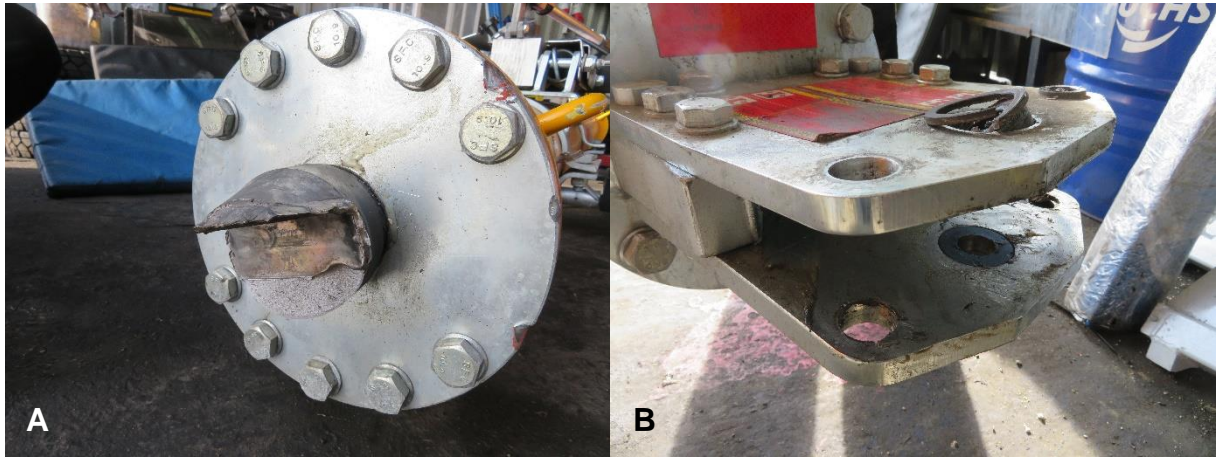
J-TOWversa1-A towbar: A – damaged towing eye, B – damaged towhead
